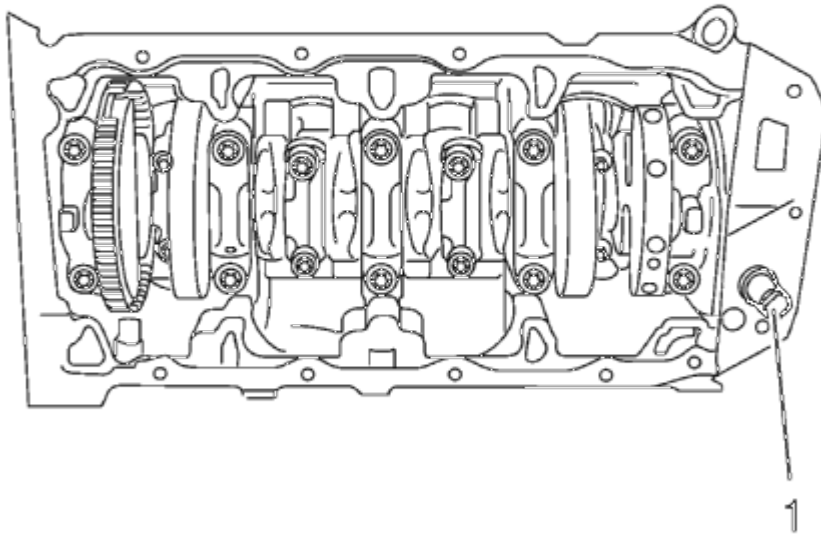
Oil Pressure Relief Valve Closure Bolt
